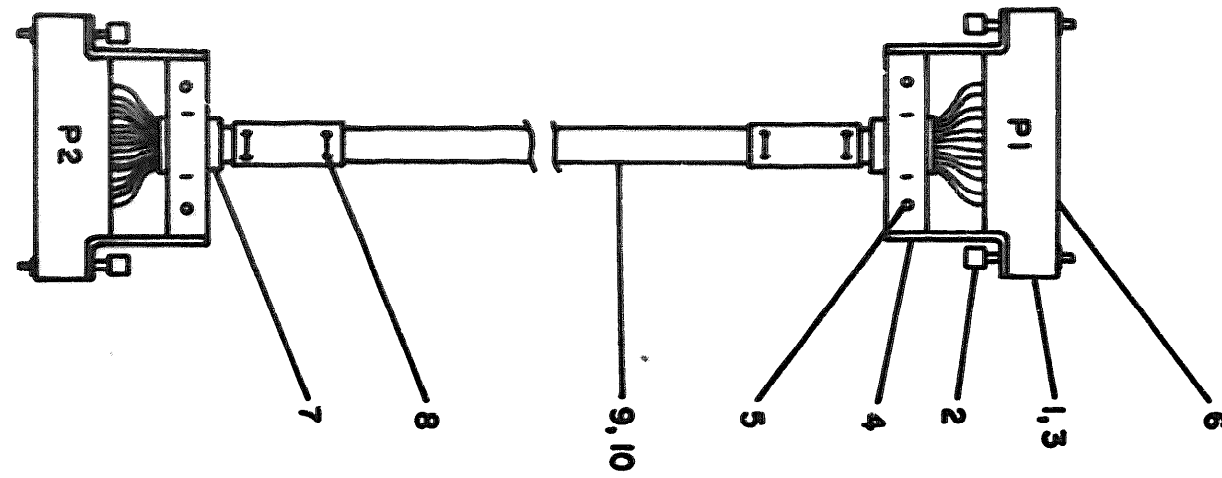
Cable Assembly, Transceiver Card To Controller 2 - 1 4
